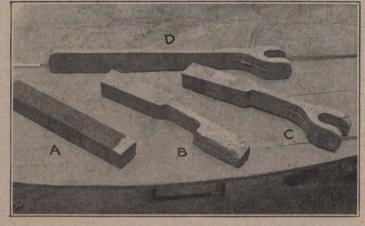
Eccentric Rod Produced on the Forging Machine.
